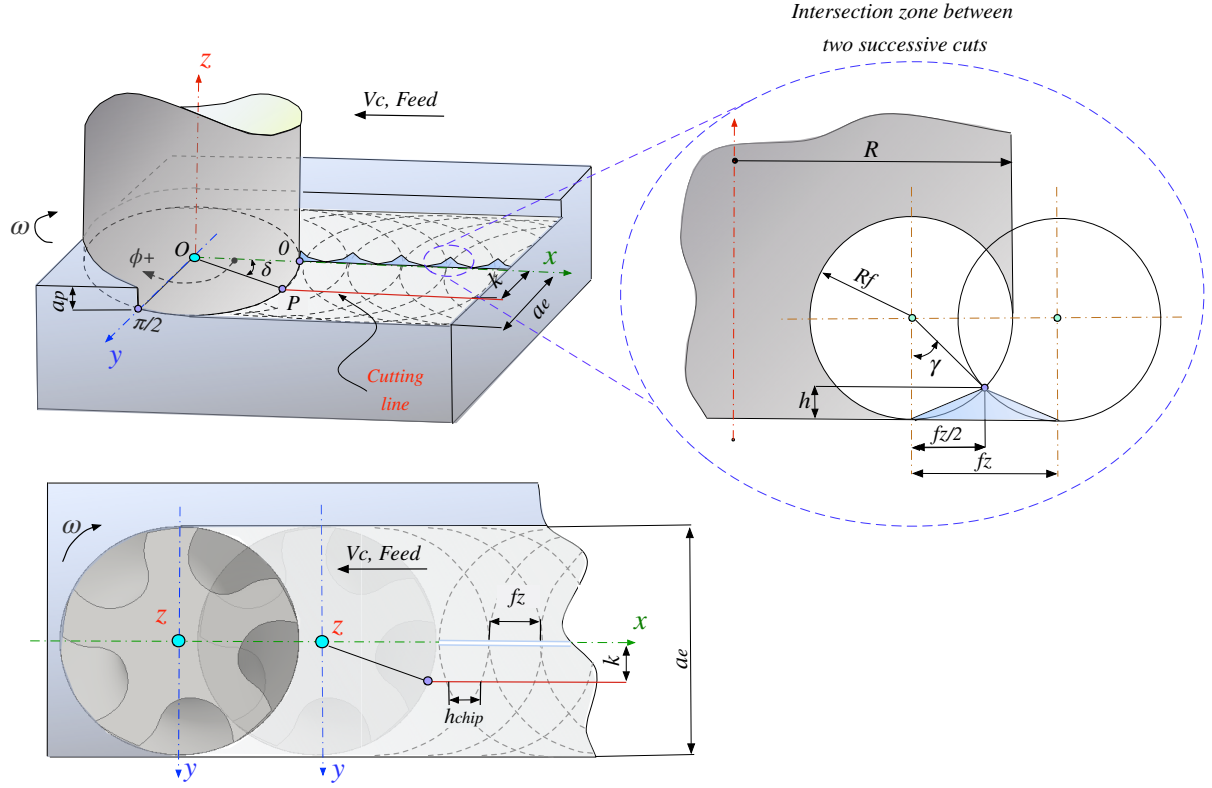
Scallop height formation mechanism and tool/workpiece intersection zone: h - scallop height; R_f - tool tip radius; R - tool radius; f_z - feed per tooth; h_{chip} - chip thickness that can be measured at the k distance from the center plane of the tool to the ‘cutting line’; δ - tool tip engagement angle; P - point on the ‘cutting line’; ϕ - tool angular position; a_p - cutting depth; a_e - cutting width; ω - tool rotation direction
